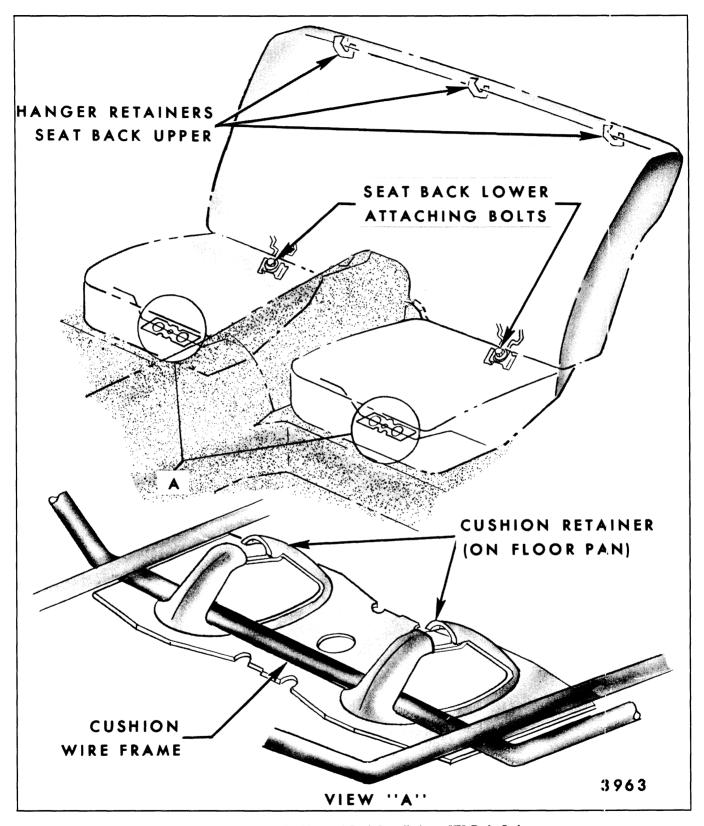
Rear Seat Cushion and Back Installation - "F" Body Styles
